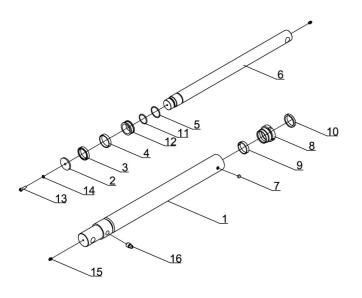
Spare parts darawing 5 - FHT-B 1200
